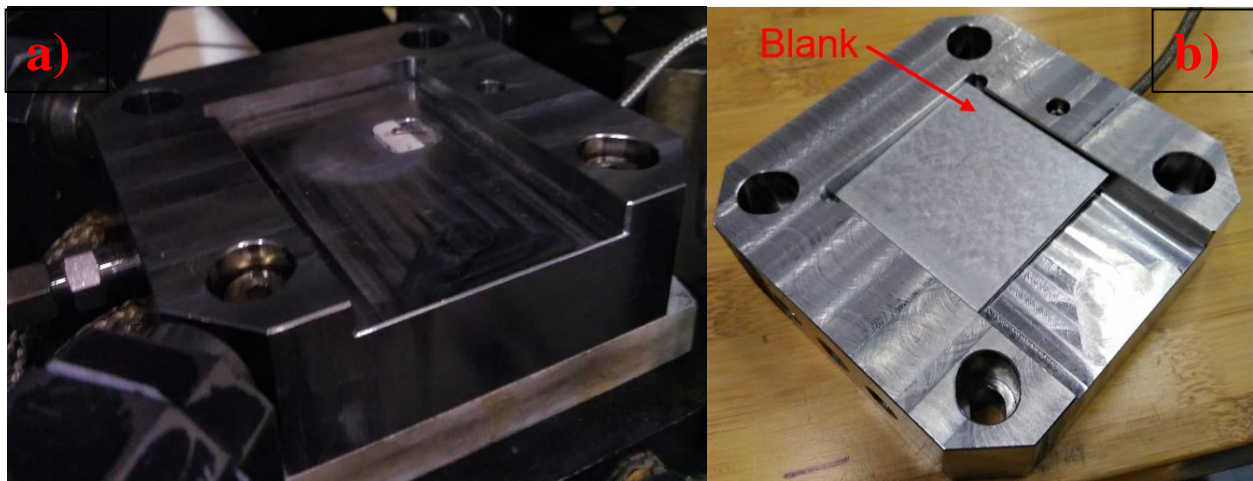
a) Modified specimen holder installed in the TCT apparatus with the spring-loaded thermocouple located below the friction cup contact area. b) TCT specimen placed on the modified specimen holder prior to contact with the friction cup.
